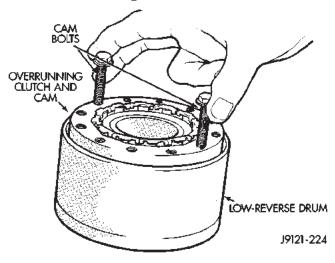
Removing Overrunning Clutch From Low-Reverse Drum
